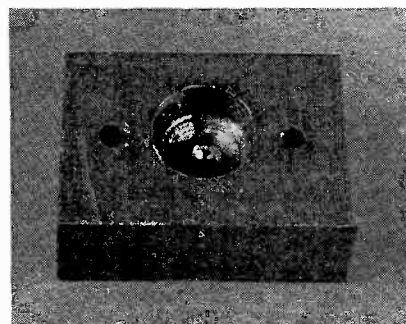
A new lower bearing for capstan shaft improved the flutter performance.
